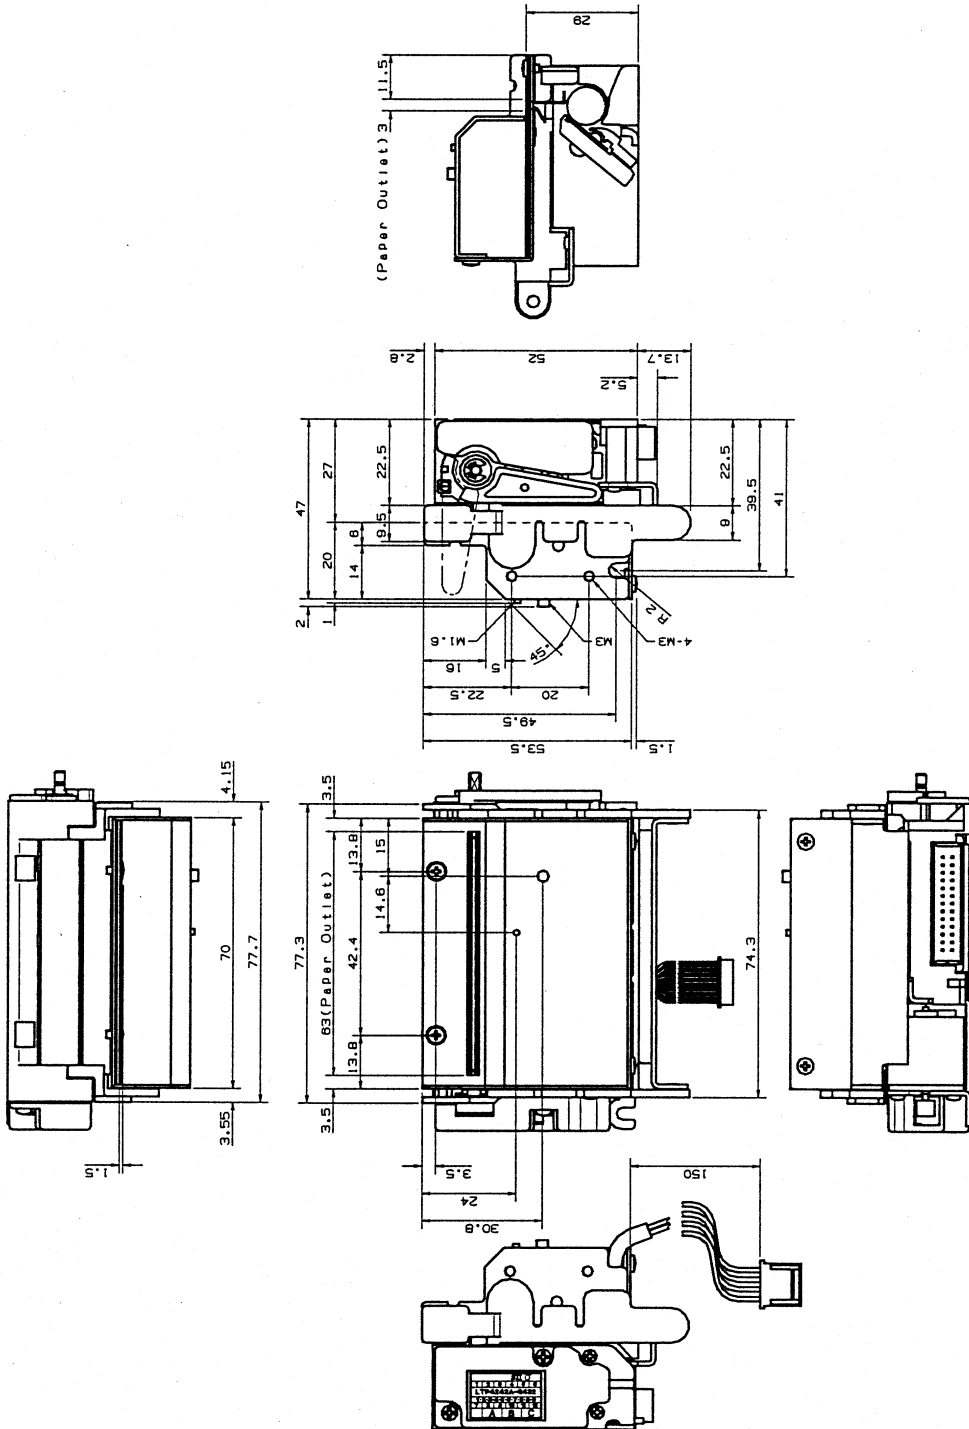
Appearance of Printer with Paper Cutter Installed
